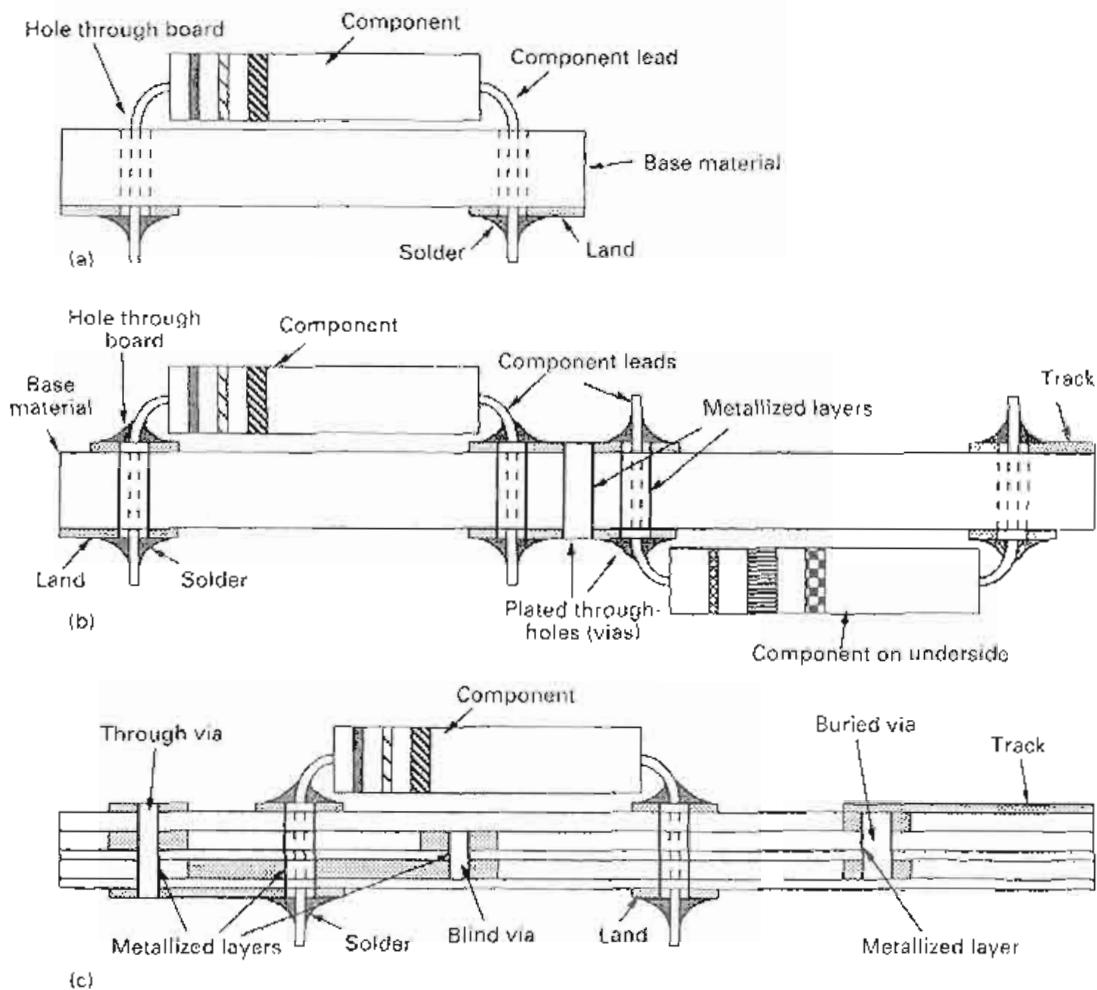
PCBs can be single sided, double sided, or multilayer. (Source: Judd, M., and Brindley, K. Soldering in Electronics Assembly, Boston: Reed International Books, 1992.)
